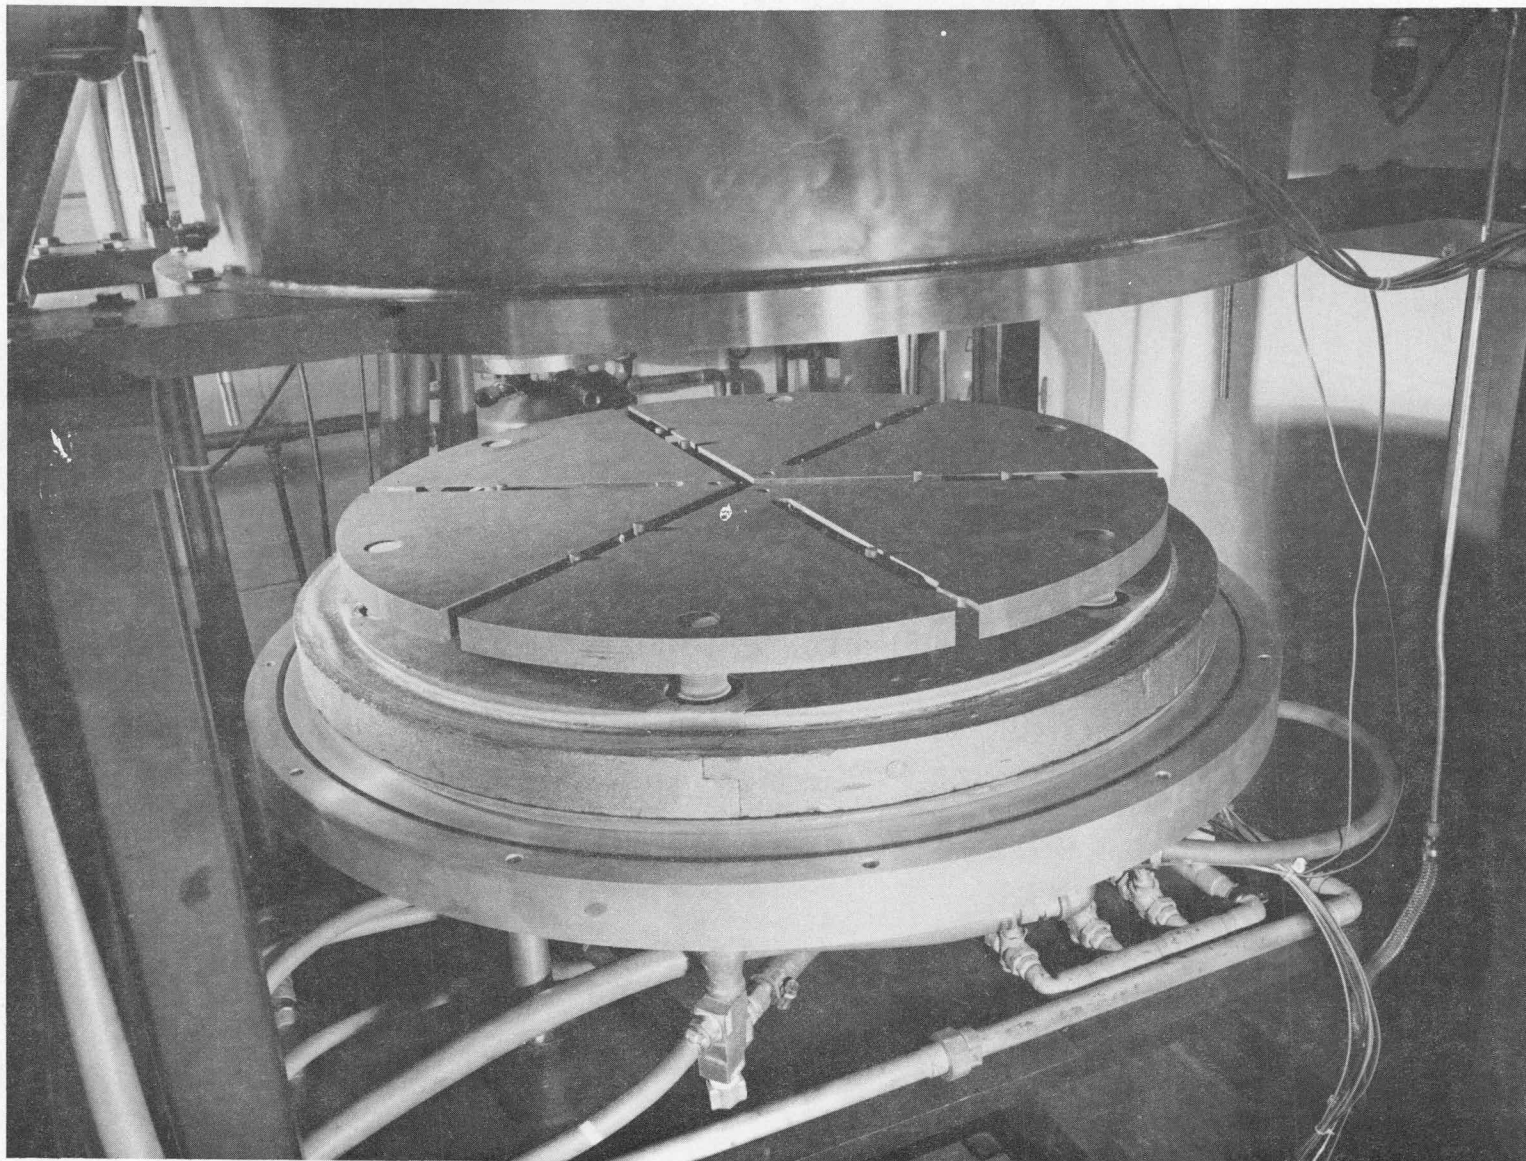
Lower Casting Furnace Flange and Heating Element Assembly
